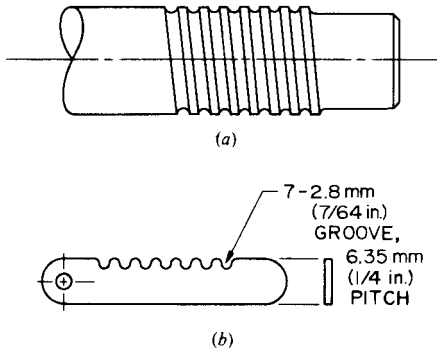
Mandrel for Coil (a) and Coil Spacing Gage (b)
